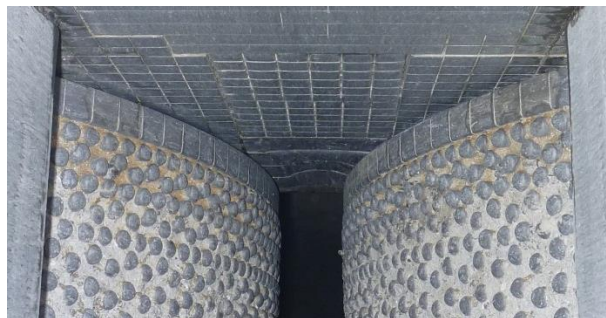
A photograph showing the assembly of the cheek plates in position against the HPGR rolls with edge protection.
